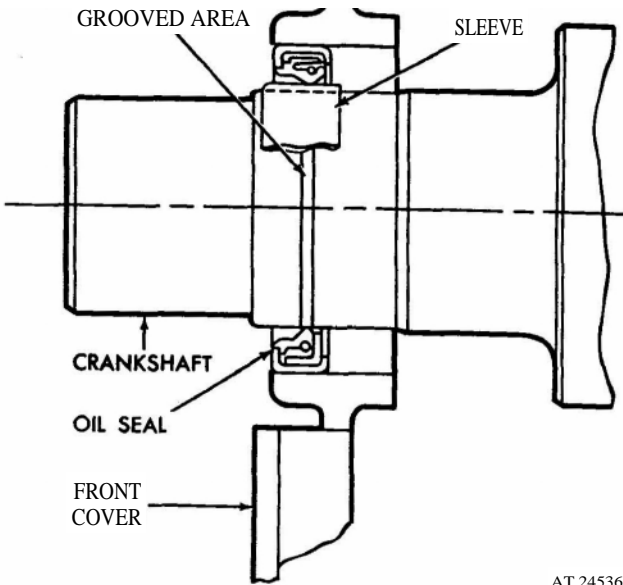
Use of front oil seal sleeve on grooved crankshaft (in-line and V engines)
